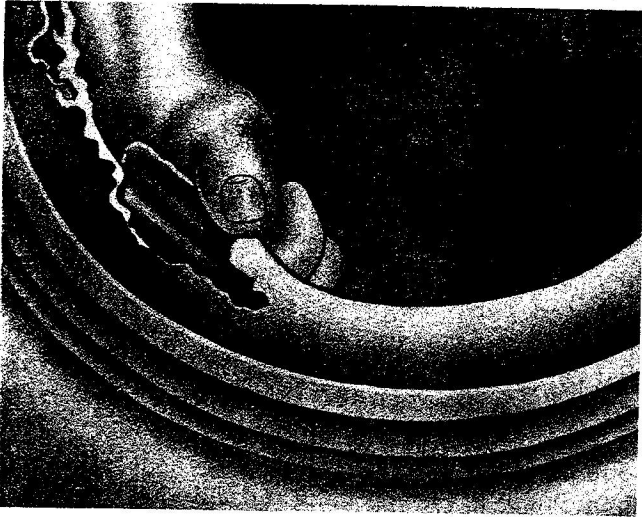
Damage Caused by Improper Use of Tools in Loosening Bead from Flange and in Prying Bead Over Rim Flange
